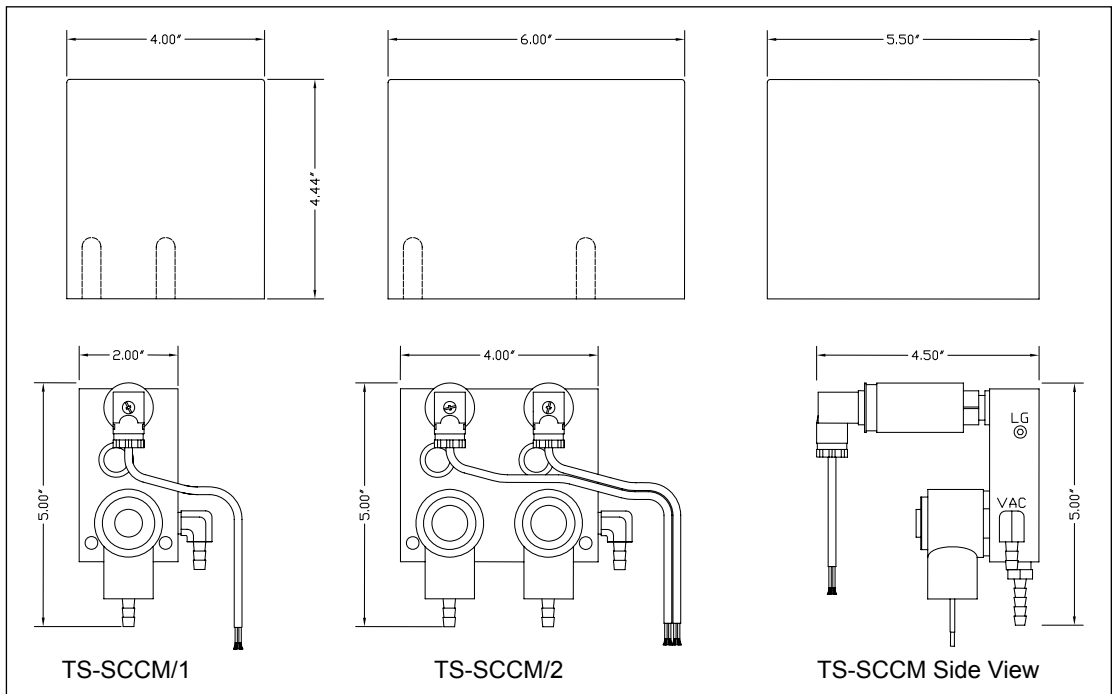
SCCM 1 and SCCM 2 Dimensions
